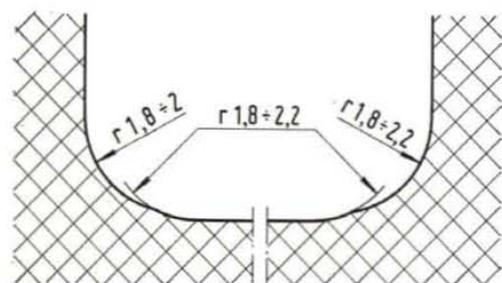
Fillet radii for intermediate main bearing journal shoulder.
